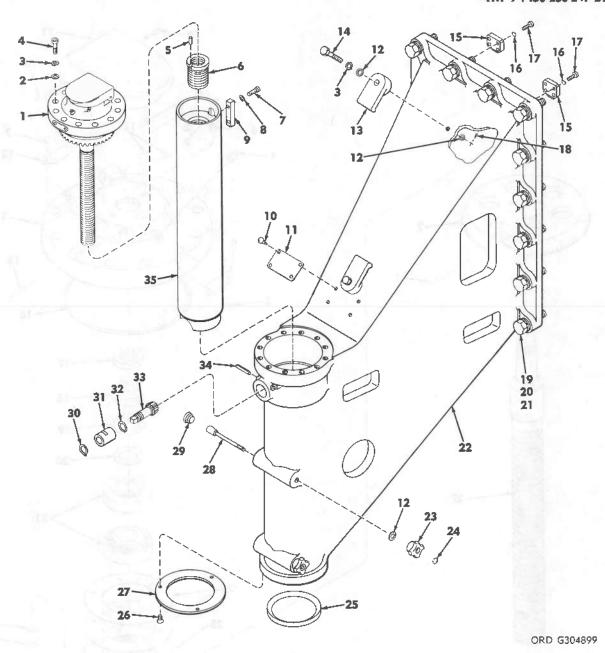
EQUIPMENT ENCLOSURE, AZIMUTH DRIVE /9136465/-PARTIAL EXPLOSED VIEW
